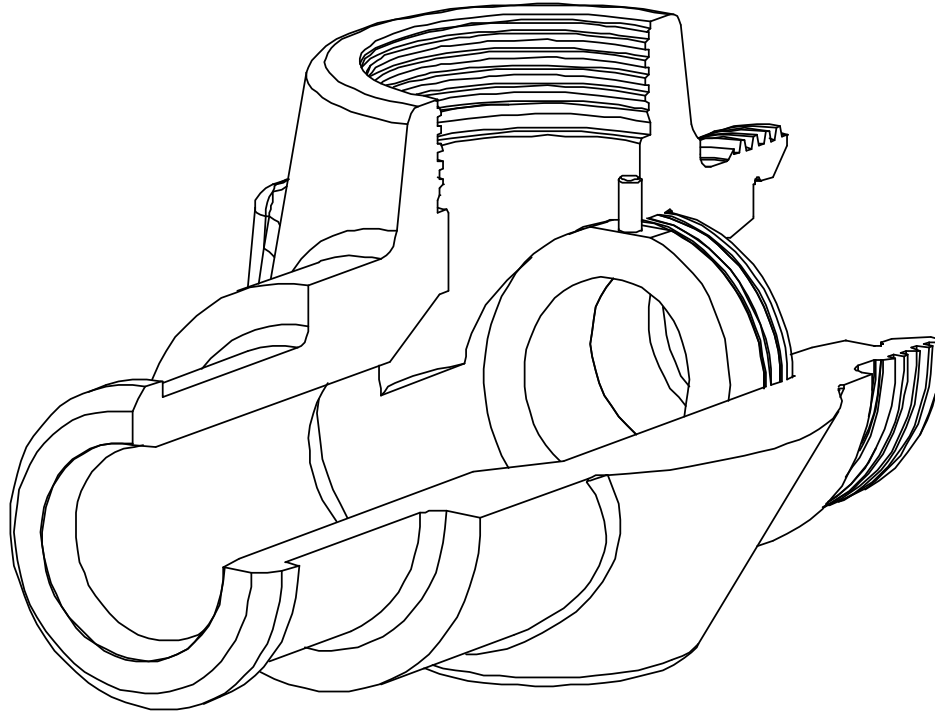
Alignment Pin and Seat Adjusted to Vertical
